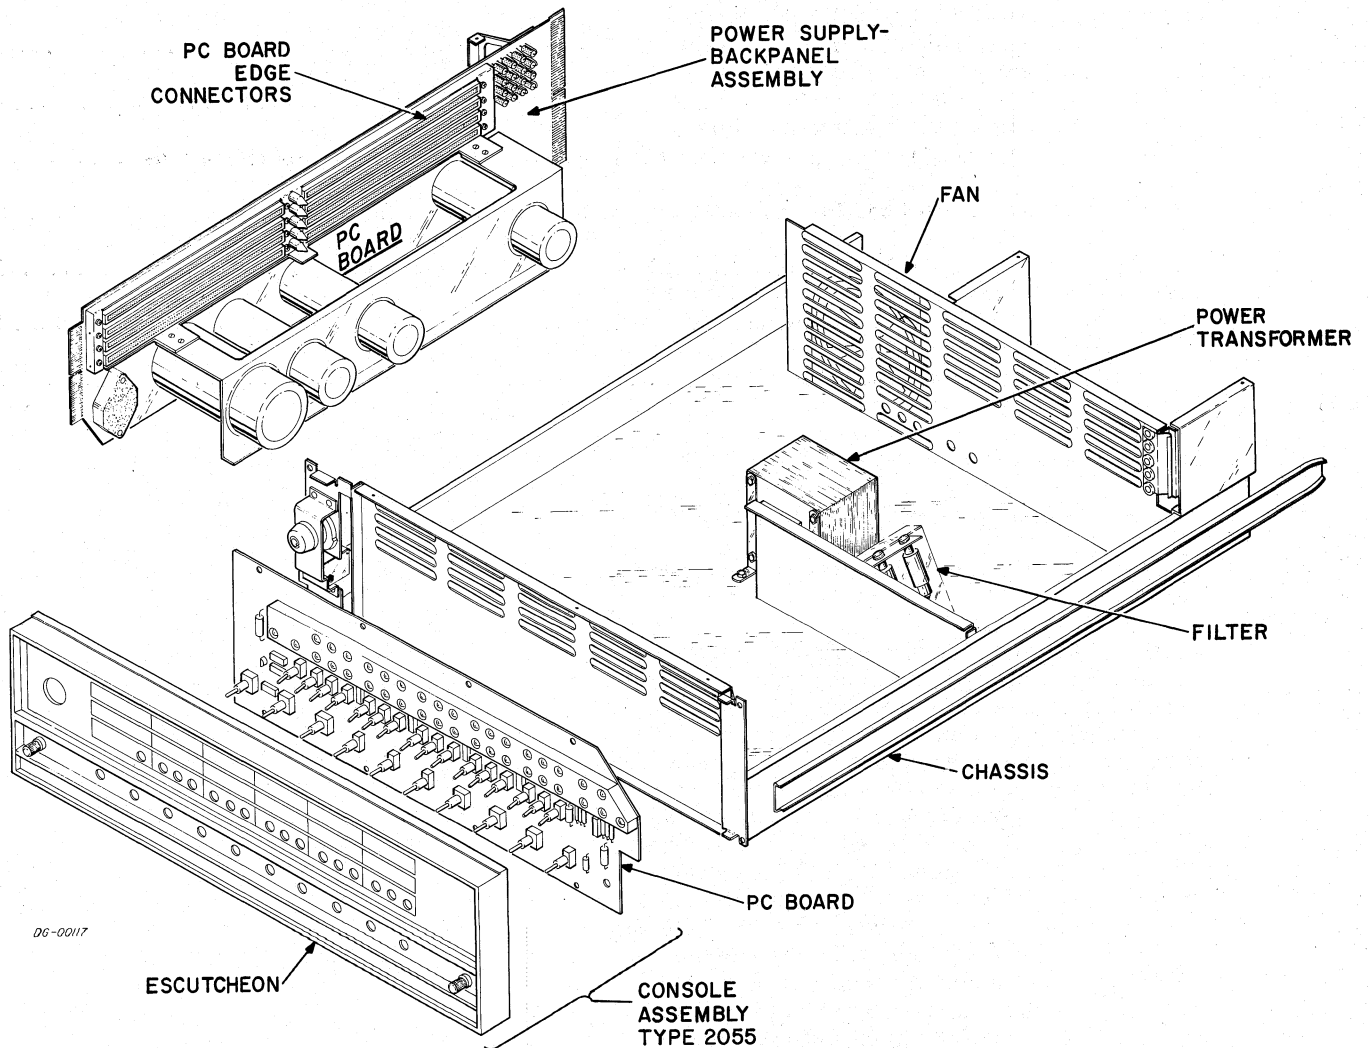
Exploded View of The NOVA 1210 Computer With Central Processor and Memory Cards Removed
